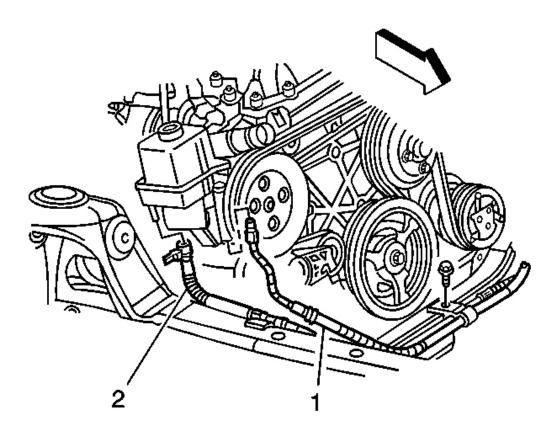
Identifying Power Steering Hoses Courtesy of GENERAL MOTORS CORP.
